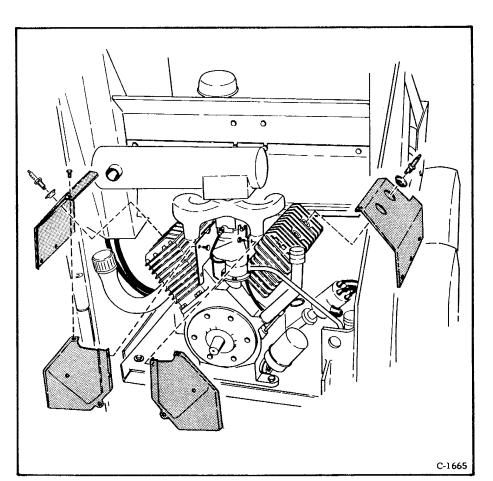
Removal of Cylinder Head Covers & Shrouding
